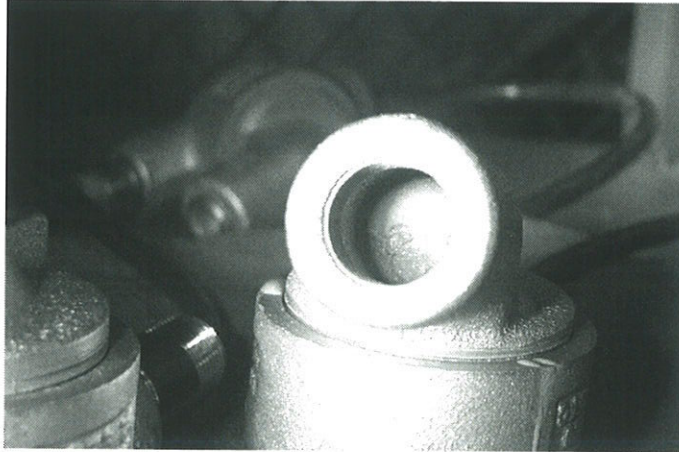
SEALING THE CONDULET® FITTINGS
